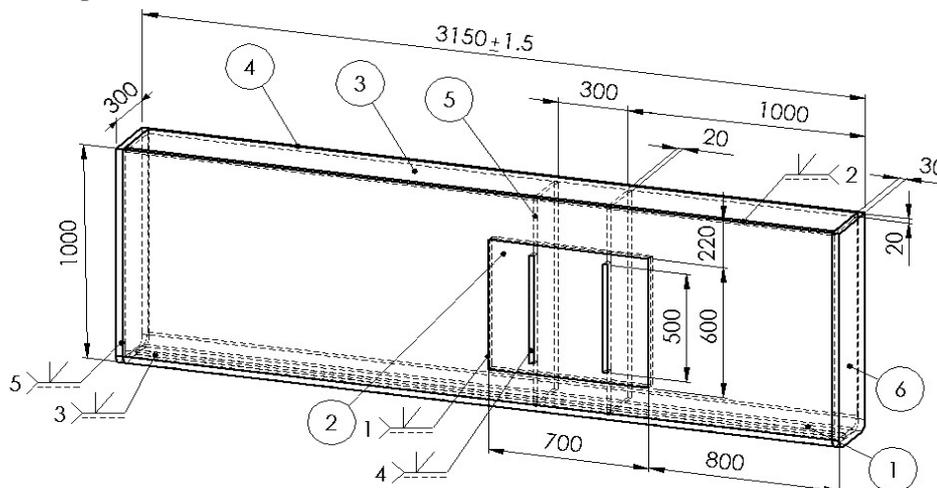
General view of front crossbeam, numeration of parts and welds
